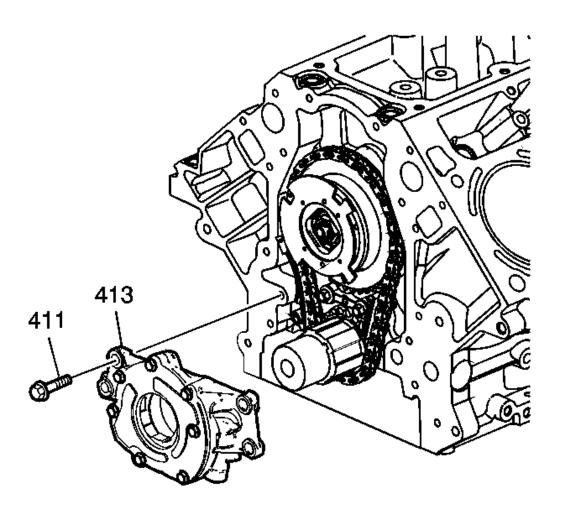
View Of Oil Pump & Bolts Courtesy of GENERAL MOTORS CORP.
